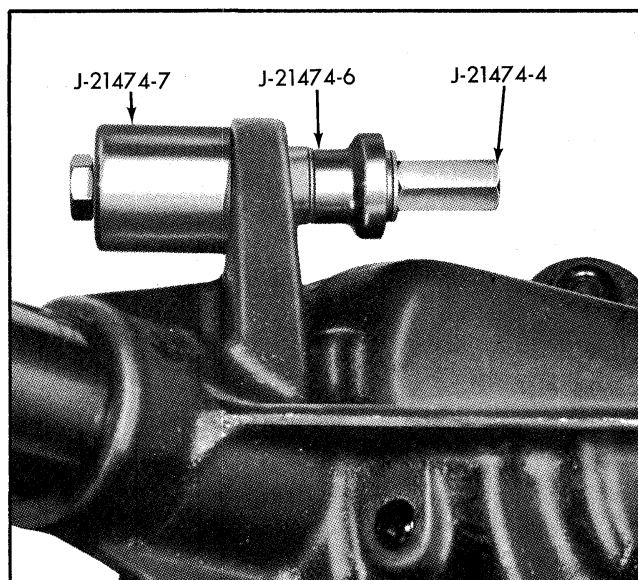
Removing Rear Upper Control Arm Rear Bushing
